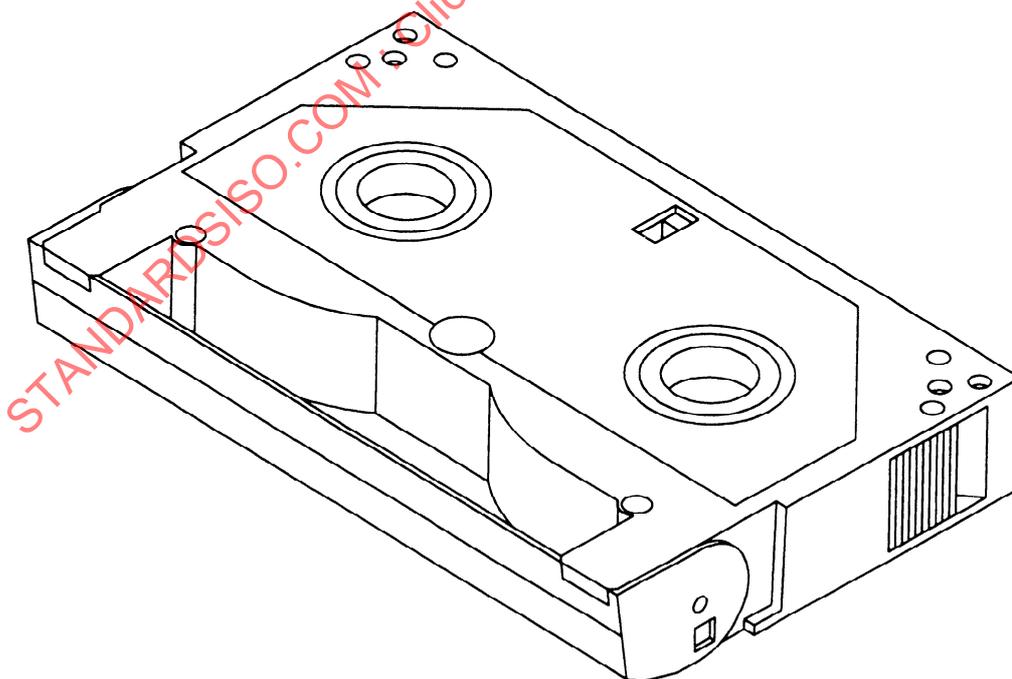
Tape cartridge assembly bottom view (lid closed)
